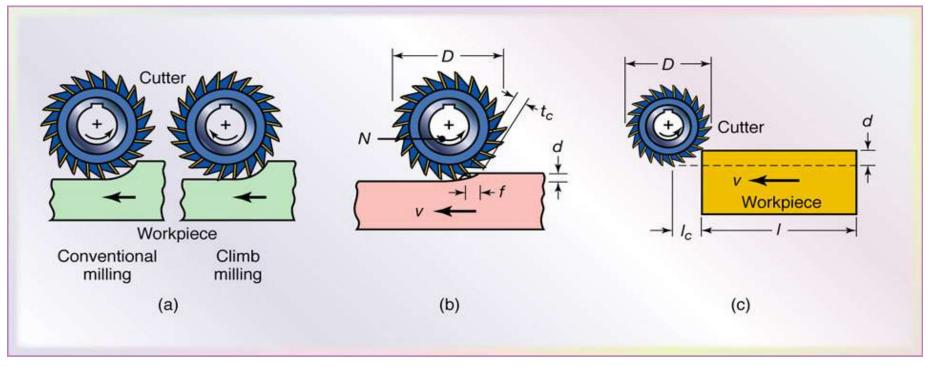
(a) Schematic illustration of conventional milling and climb milling. (b) lab-milling operation showing depth-of-cut, d; feed per tooth, f; chip depth-of-cut, t_c ; and workpiece speed, v. (c) Schematic illustration of cutter travel distance, l_c , to reach full depth-of-cut.
